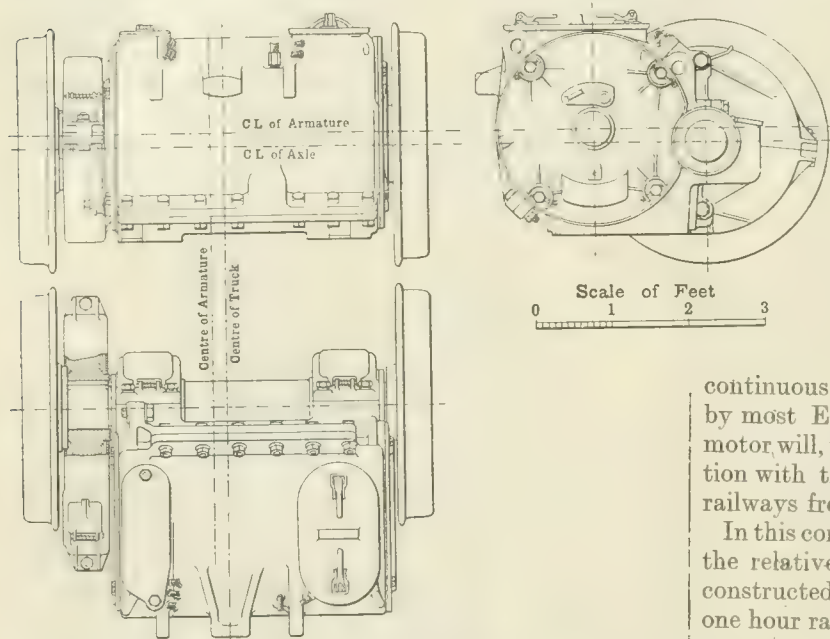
OUTLINE DRAWING OF 100 H.P. B.T.H. SINGLE-PHASE MOTOR.
